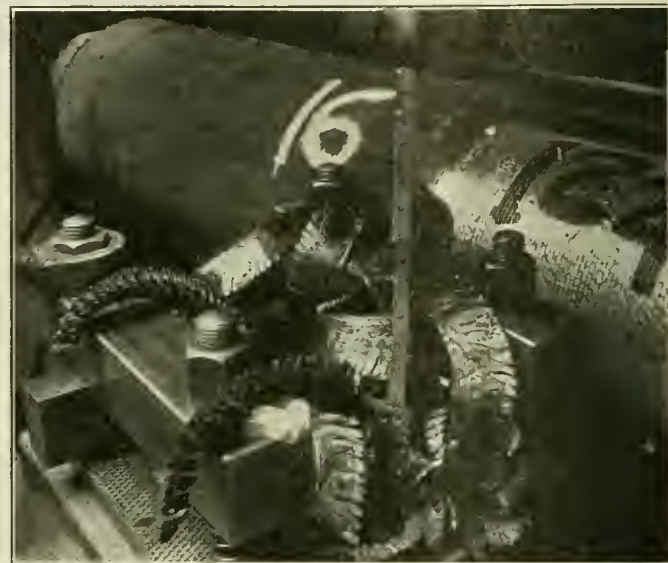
View Showing Chips Taken in .50 Carbon Forging
